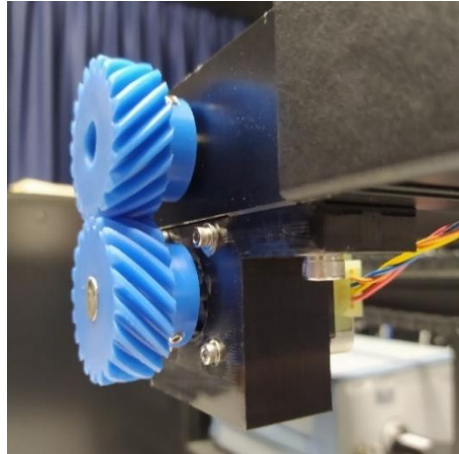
Motor and transmission assembled in the horizontal axes
